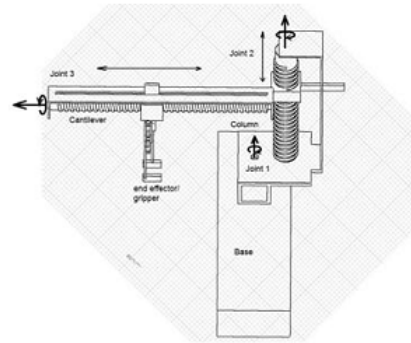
A sketch of the serial manipulator showing all the joints and links.
